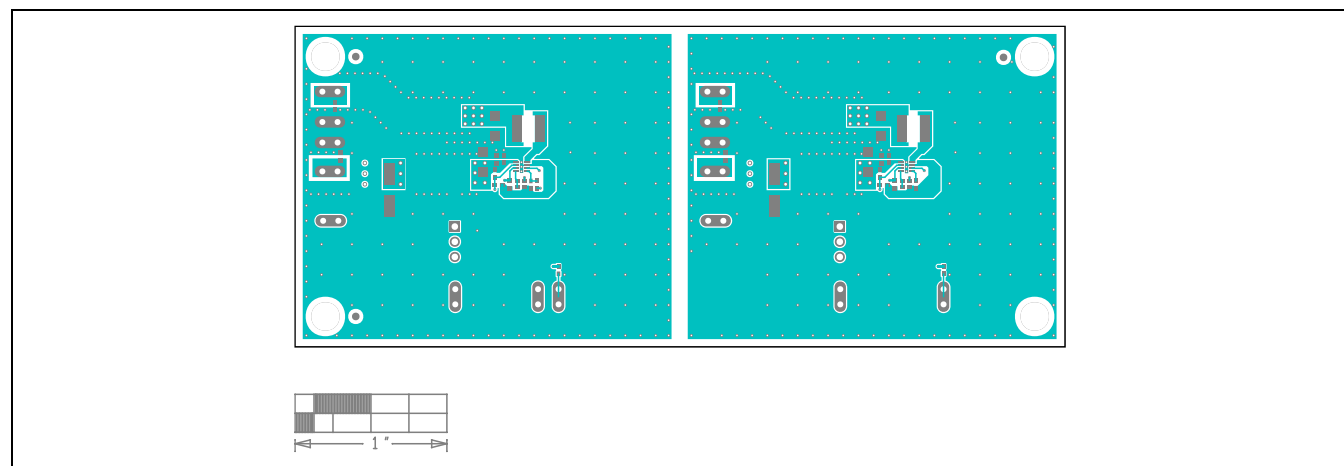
MAX17570C/MAX17570F EV Kits PCB Layout Diagram—Top Layer
